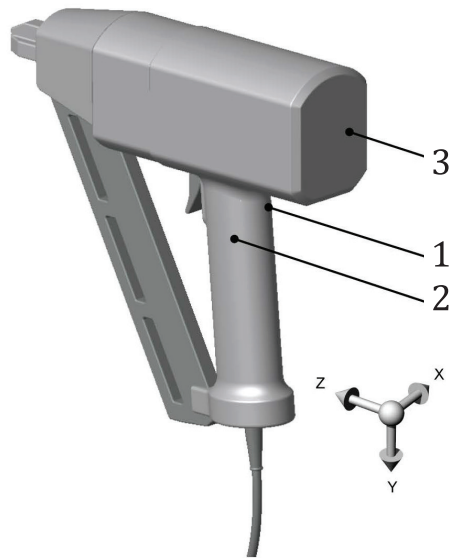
Measurement locations — Pneumatic fastener driving tool
